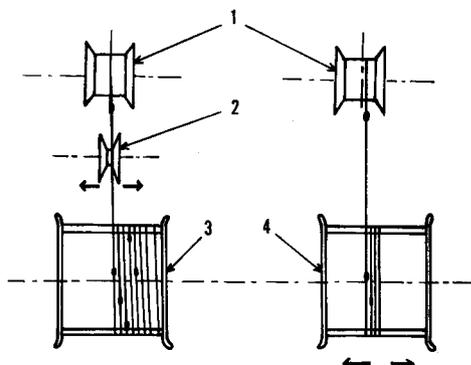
Arrangement of guide roller. 1: First guide roller (fixed), 2: Second guide roller (threading roller), 3: Fixed drum, 4: Movable drum.
